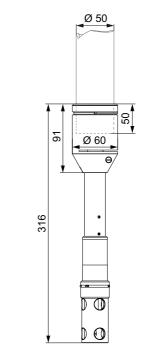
Dimensions of sensor with holder (in mm), pipe with outside diameter 50 mm not included
